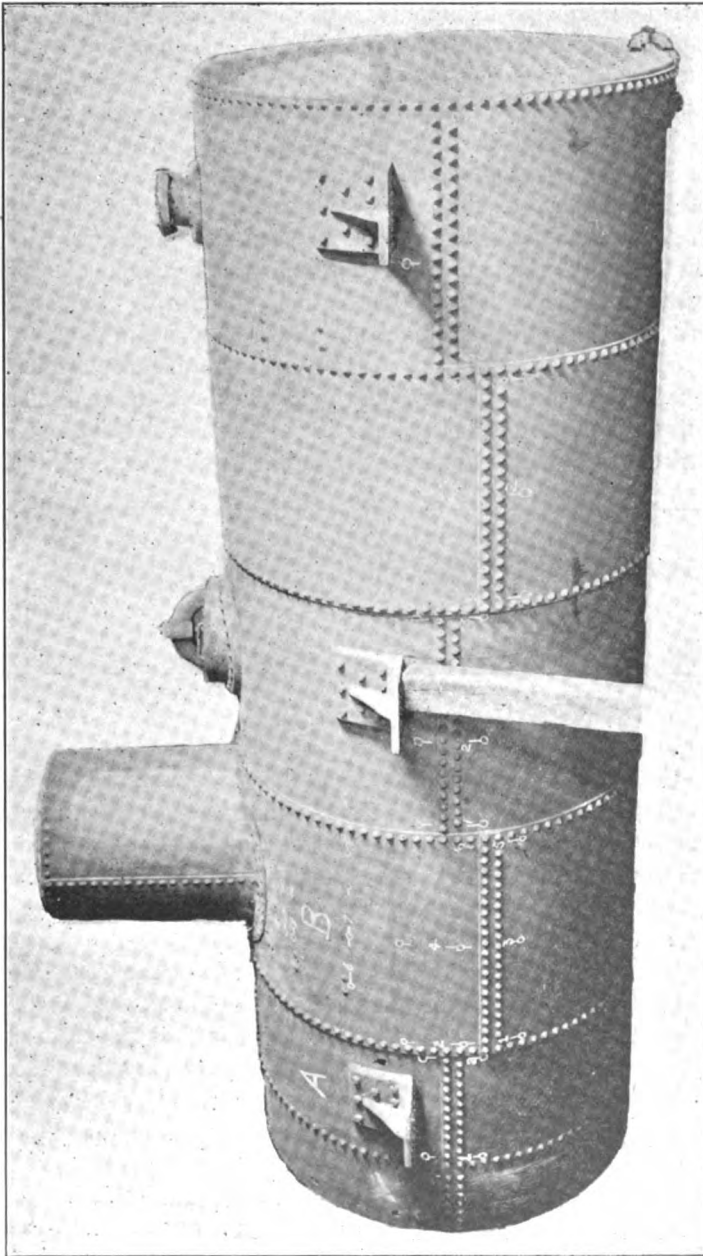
STEAM BOILER No. 4084 BEFORE TESTING
